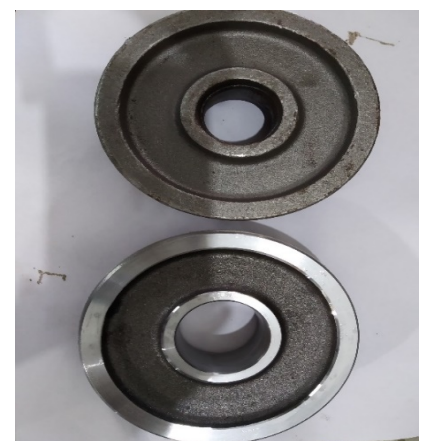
Machining operation details identified for study in the machine shop of the industry.
